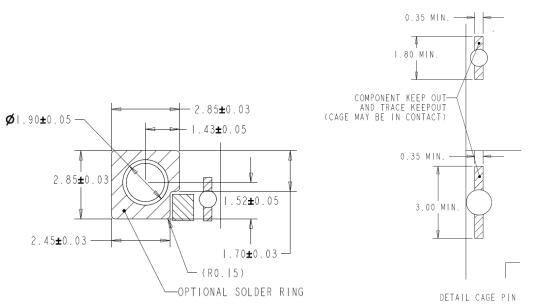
Details of optional solder ring (left) and cage pin keepout (right)
